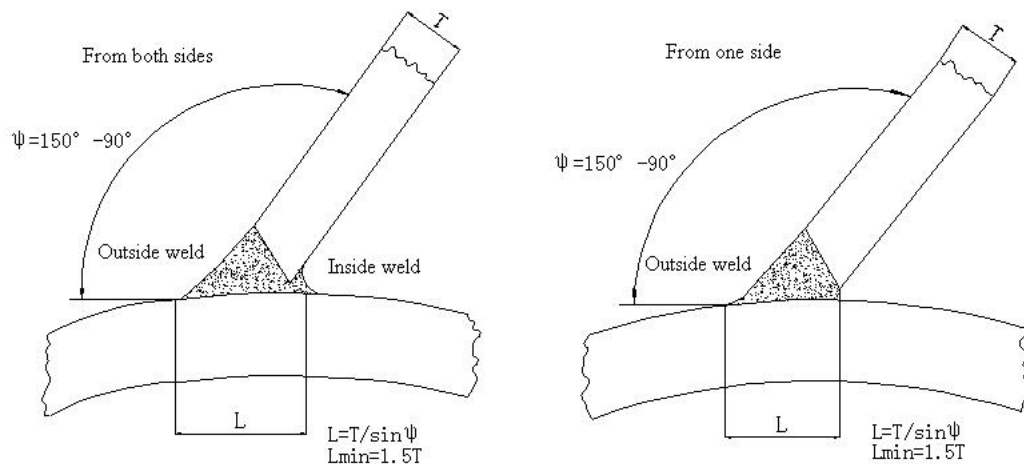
(3) Weld Location 2
